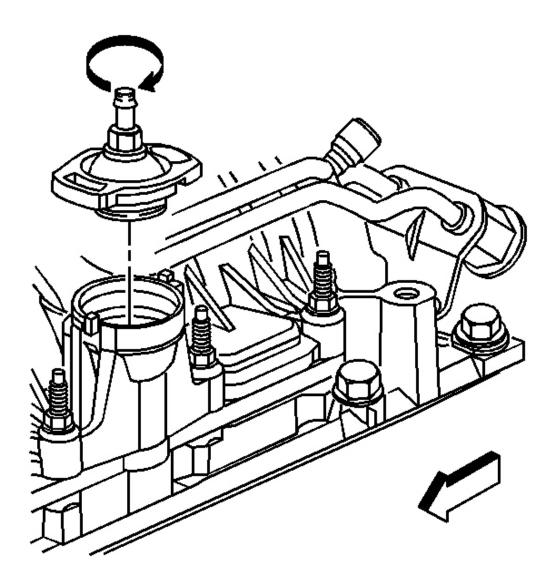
PCV Valve Cover Courtesy of GENERAL MOTORS CORP.
